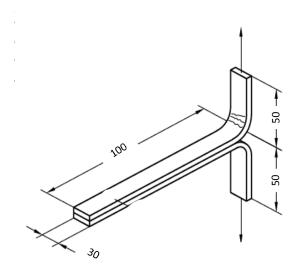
Adhesive joint for peel test (dimensions in millimetres)
